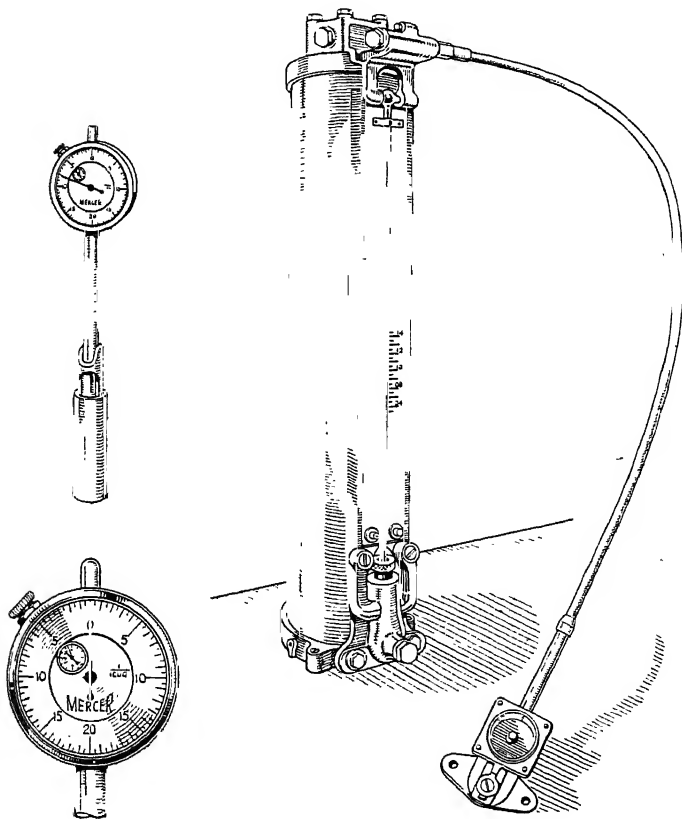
Mercer cylinder gauge in use. Checking the bore diameter for size, taper, and ovality.
